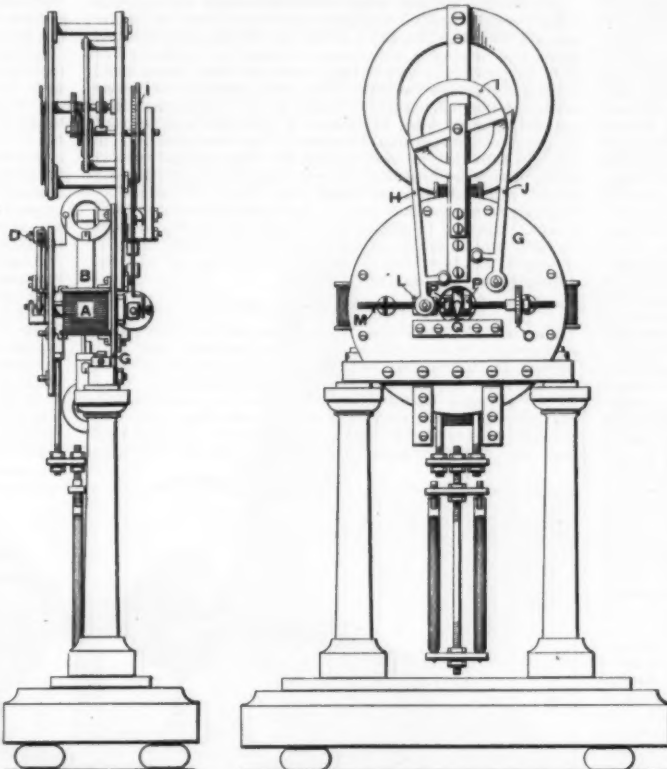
BACK OF CLOCK, SHOWING PAWLS, SECONDS WHEEL, AND KNIFE EDGE.
